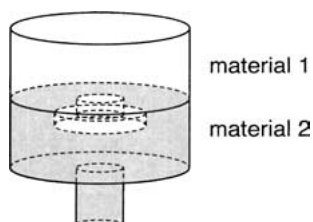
Cross-sectional geometry of the injection molded component used in this study.
